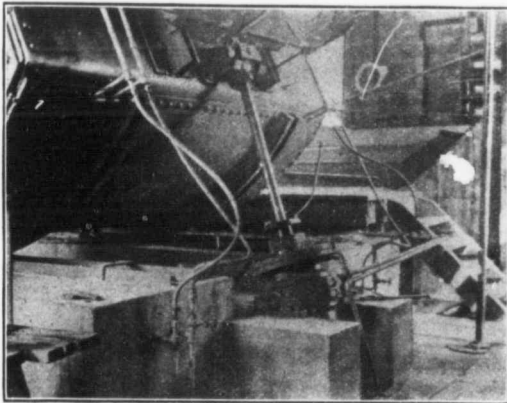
Furnace Hydraulic Tilting Mechanism.
